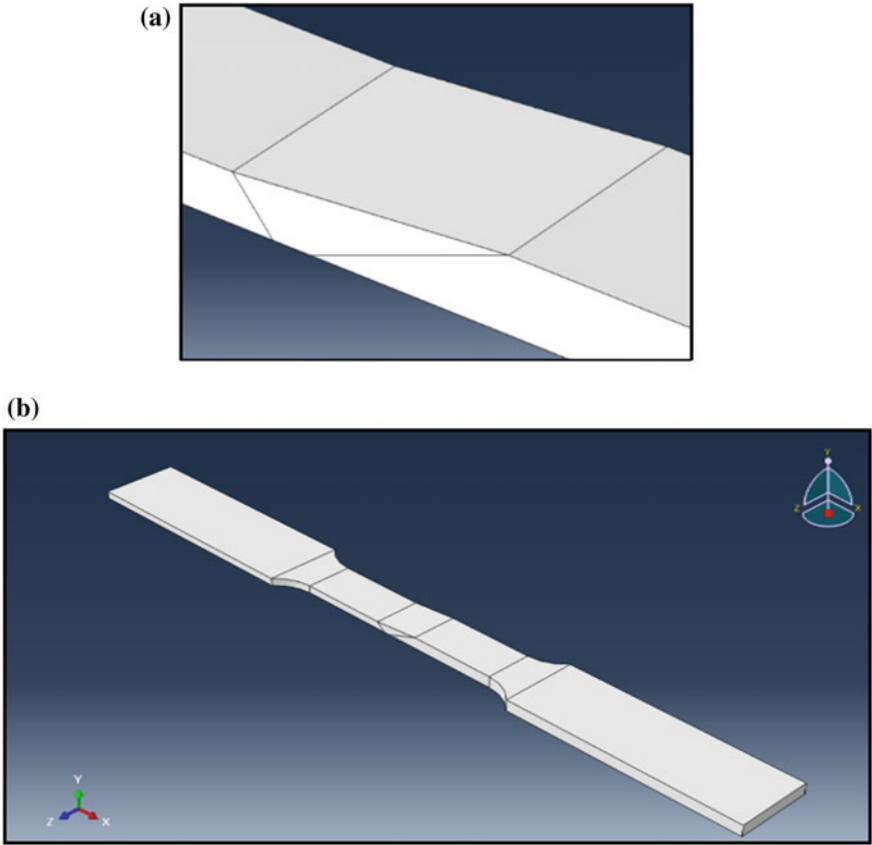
Details of the tensile test specimen, a cross-section, b overall tensile test specimen
